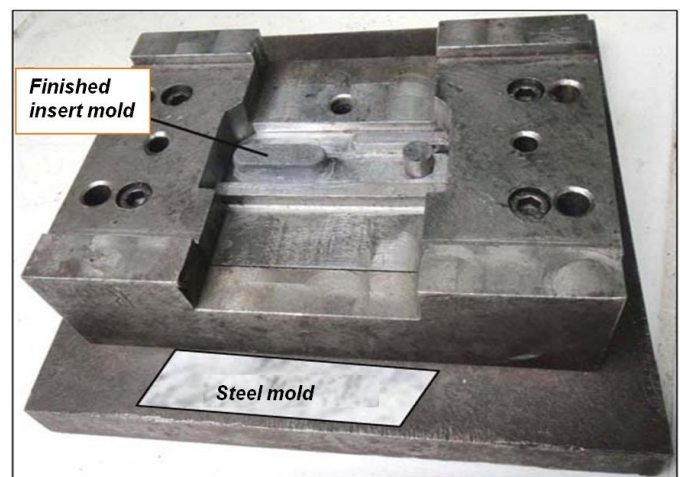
Finished insert mold (made of composite) mounted on the steel mold
